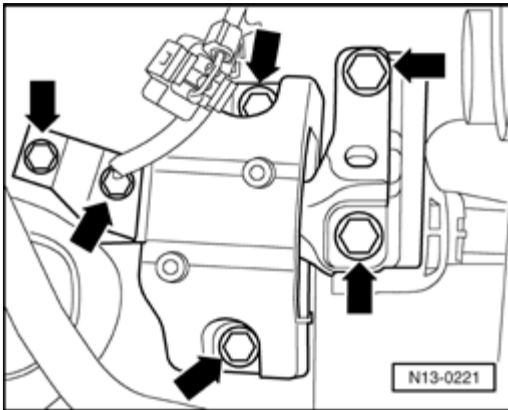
Locating Securing Bolts From Assembly Mounting/Engine Bracket, Assembly Mounting/Body And Assembly Mounting Bracket/Body
